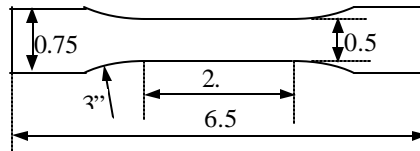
Dimensions of the ASTM tensile test specimen
